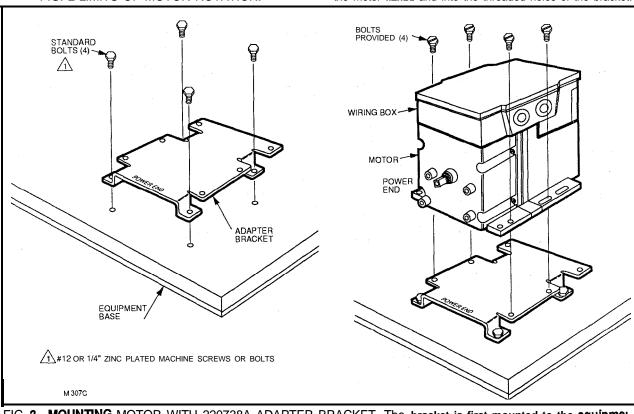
MOUNTING MOTOR WITH 220738A ADAPTER BRACKET. The bracket is first mounted to the equipmer with standard bolts. The motor is then mounted to the bracket using the bolts provided with the bracket, which thread into the threaded bracket holes.
